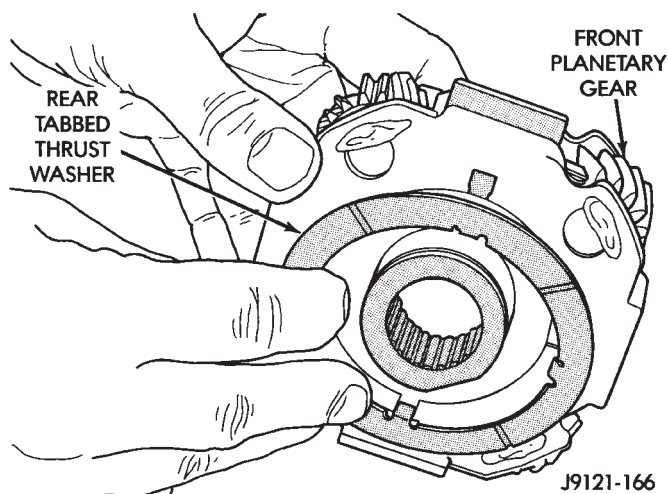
Installing Rear Thrust Washer On Front Planetary Gear
